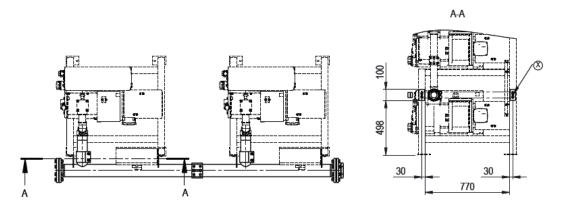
Dimensions vacuum system DUPLEX VRD (connecting line)
